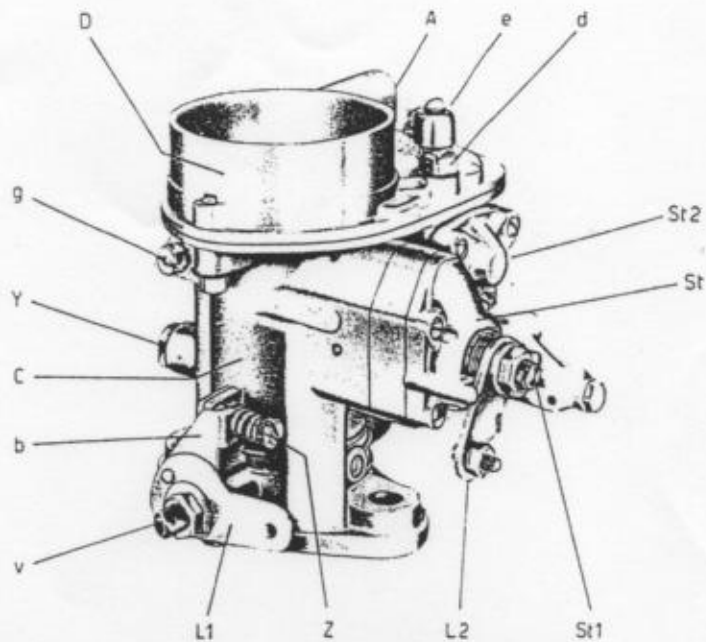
Solex Type 40 ICB Downdraught Carburettor
